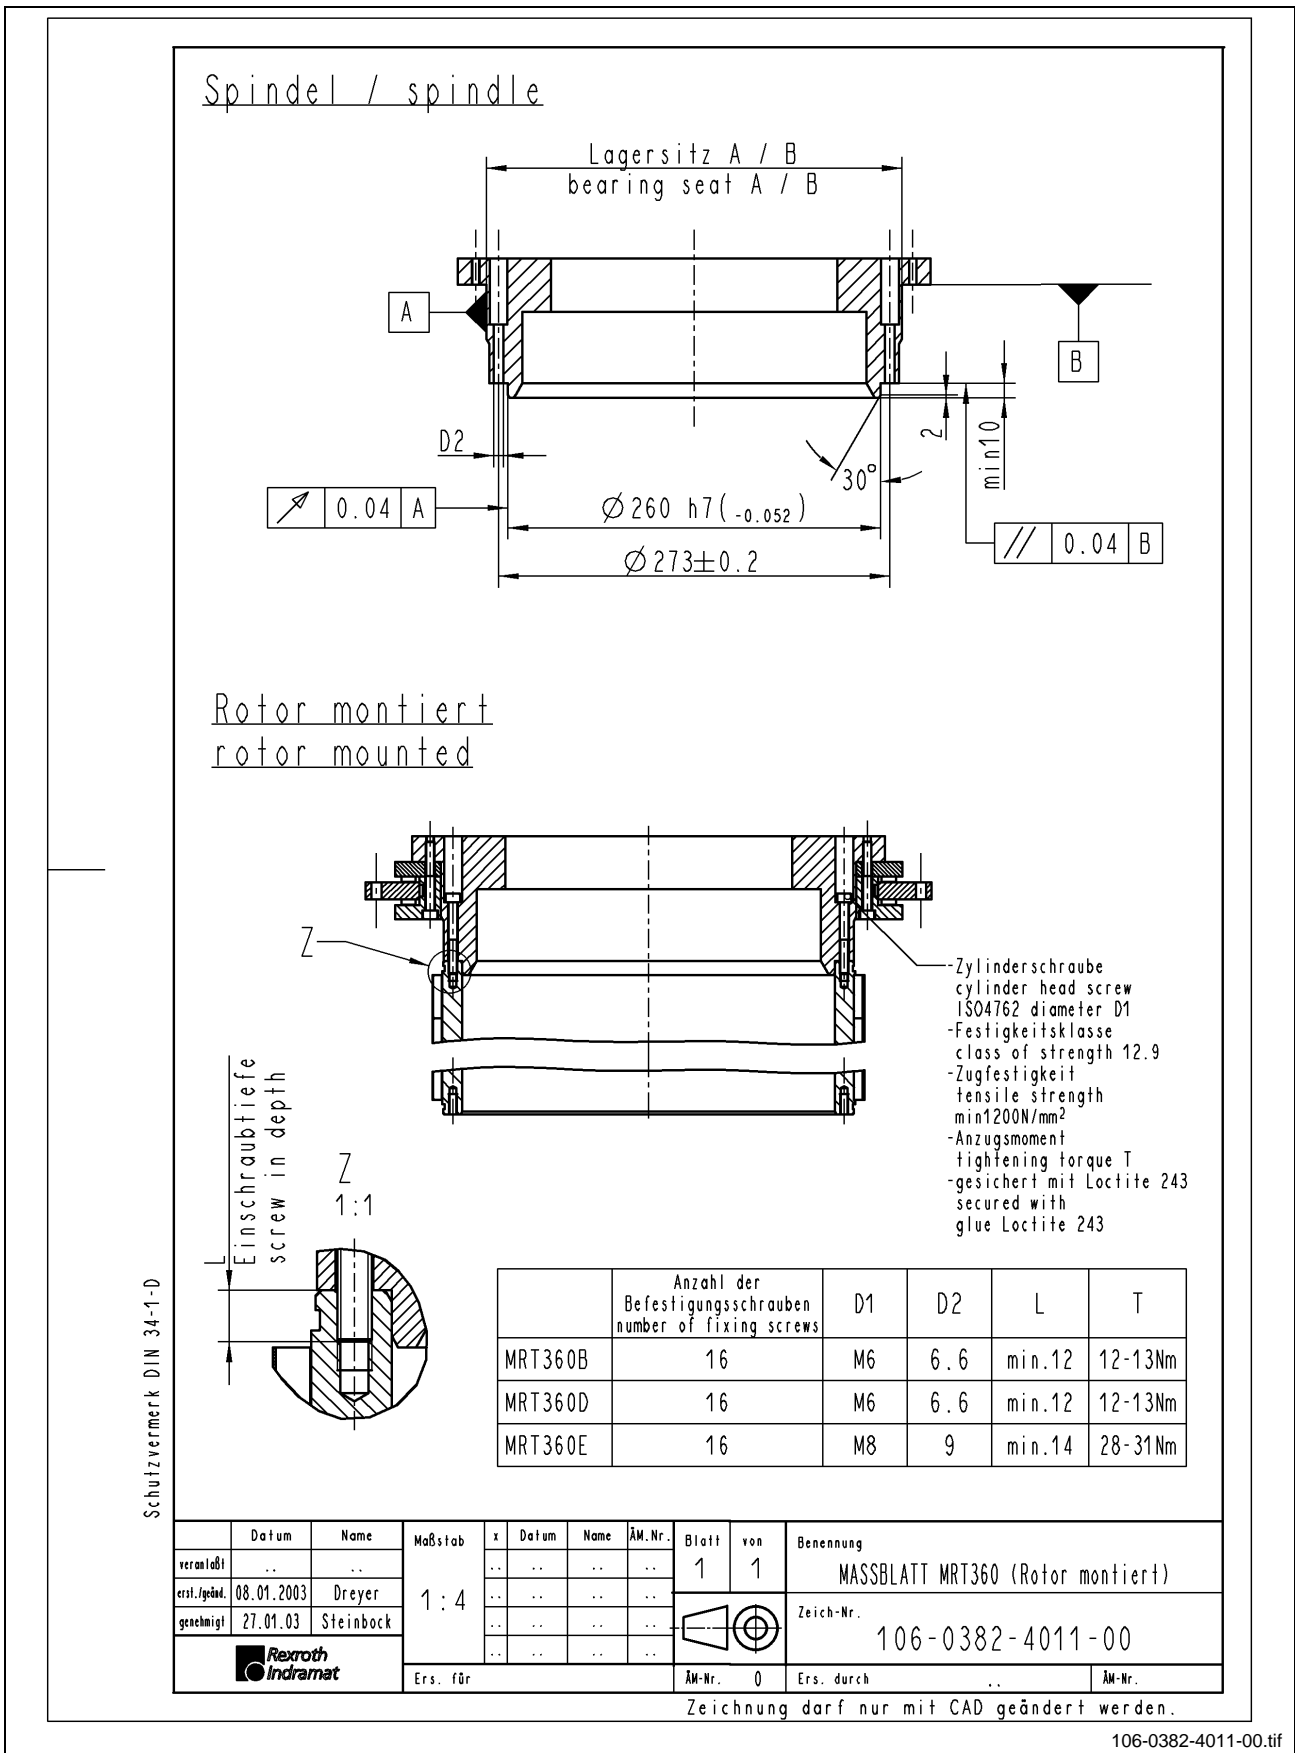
Dimension sheet Rotor MRT360, mounted
